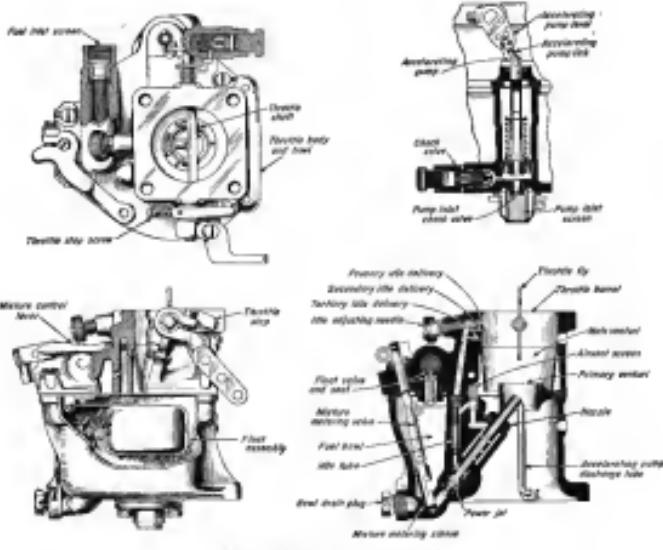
Cutaway illustration of carburetor with relative positions of the components depicted.
